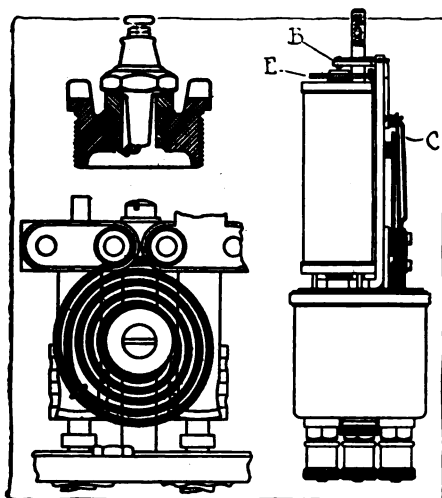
Upper left—Type of spark plug best suited to Hudson motor. Fig. 2—Lower left—Lamp dimming resistance which is damaged by varying the position of the ring that holds the coils together. Fig. 3—Right—Ignition relay showing adjusting screw at E
